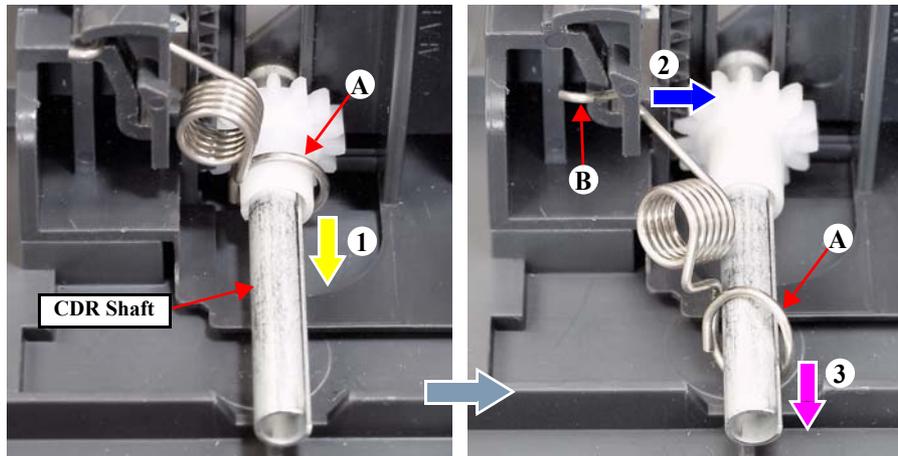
Removing the CDR Guide Lever Spring (2)
